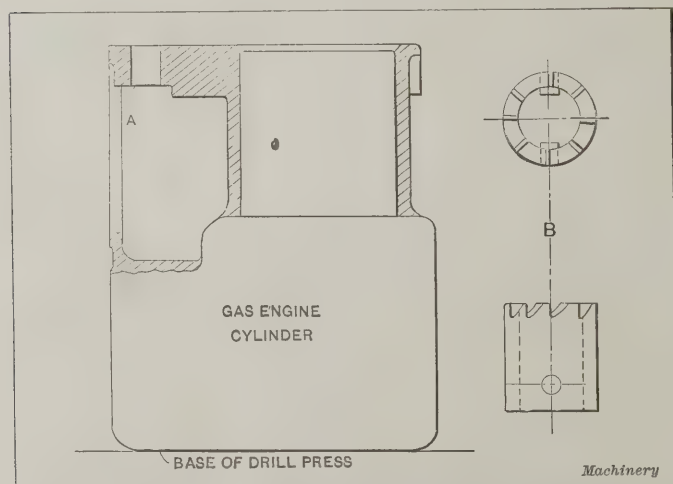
The Gas Engine Cylinder and the Cutter used in Facing the Boss
